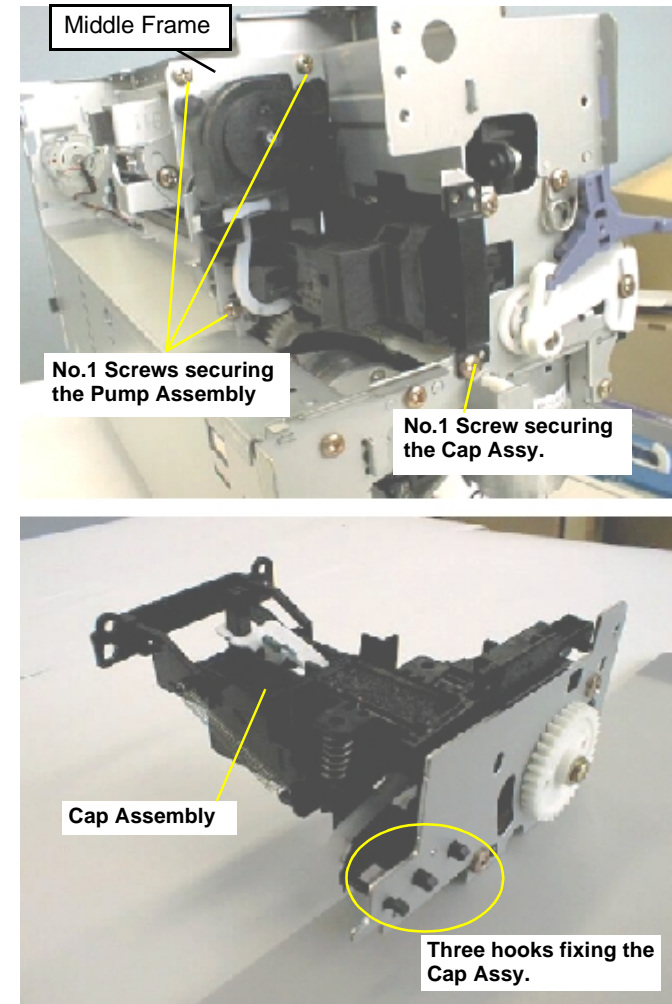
Removing the Pump Assembly & Cap Assembly
